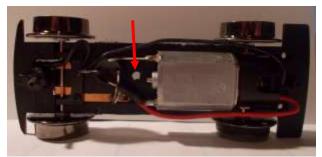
A hole is drilled just ahead of the motor - see text for details.
